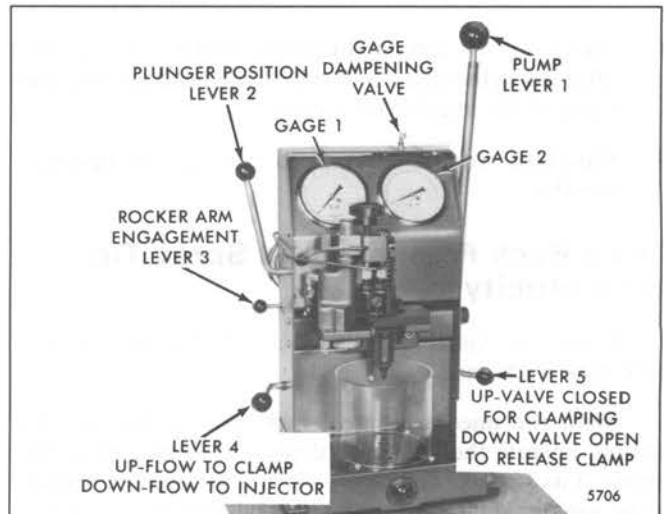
Injector in Position for Testing with Tester J 23010-A
